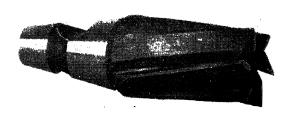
End mill. To make counterbored holes or spot-faced flats or similar surfaces, an end mill is used. (Brown and Sharpe.)
